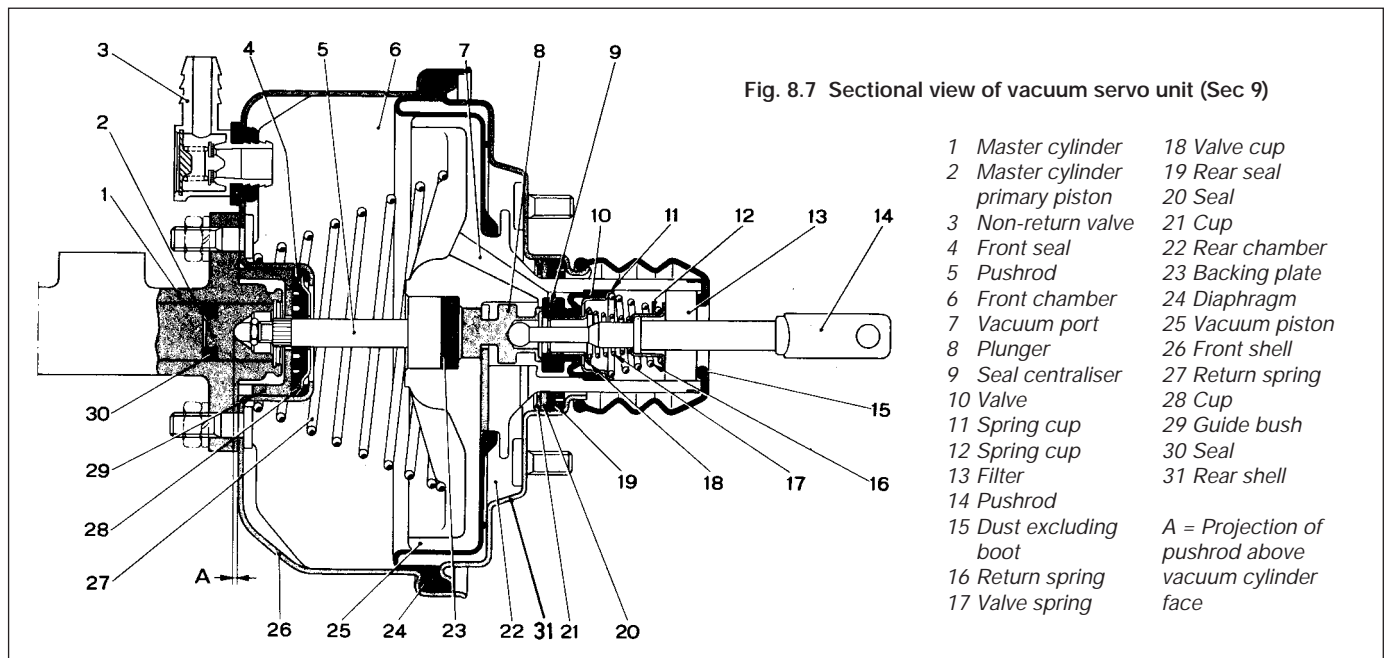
Sectional view of vacuum servo unit (Sec 9)
